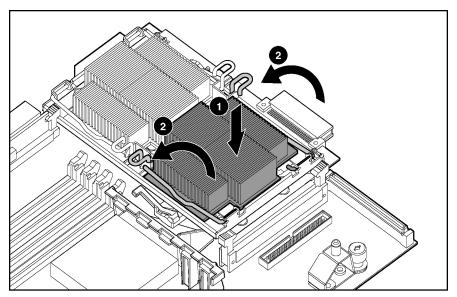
Installing the heatsink onto the processor and closing the locking latches
